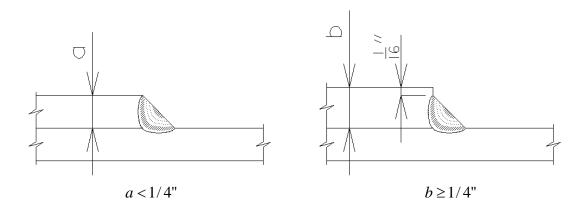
Maximum Fillet Weld Sizes
